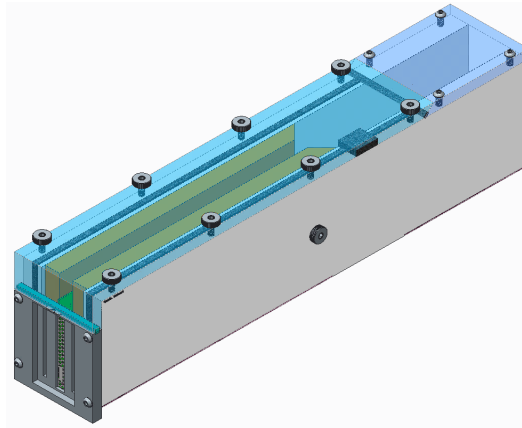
Tester isometric view in SINGLE-SLOT Adapter Add-in Card AFI testing configuration
